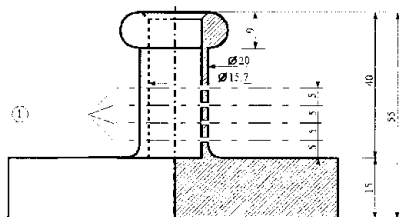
Hollow bronze cylinder, closed at one end; Plan and cut dimensions in mm
